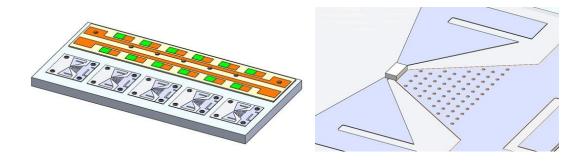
3D Model of Test Setup Assembly and Individual Test Board
